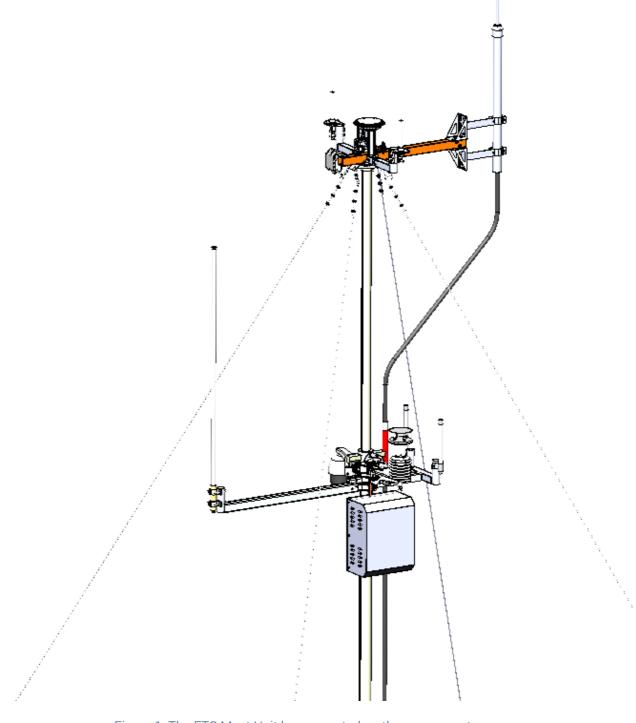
The FTS Mast Unit box, mounted on the upper mast
